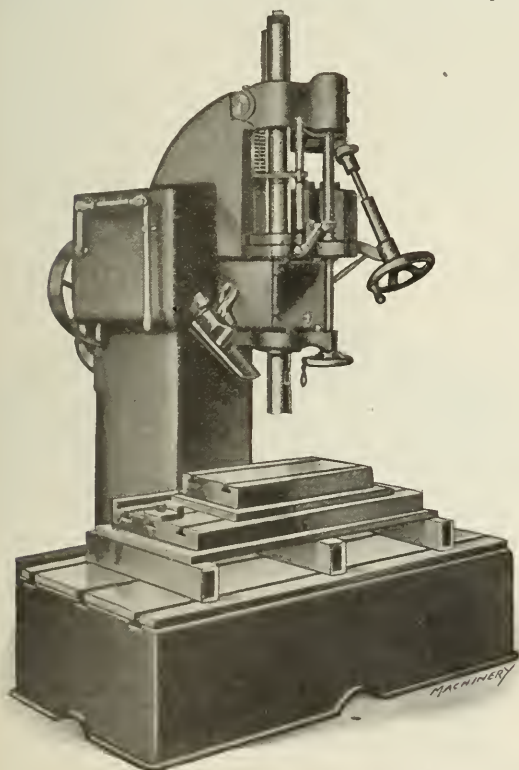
Medina Universal Spacing Machine for Jig Boring and Similar Operations
